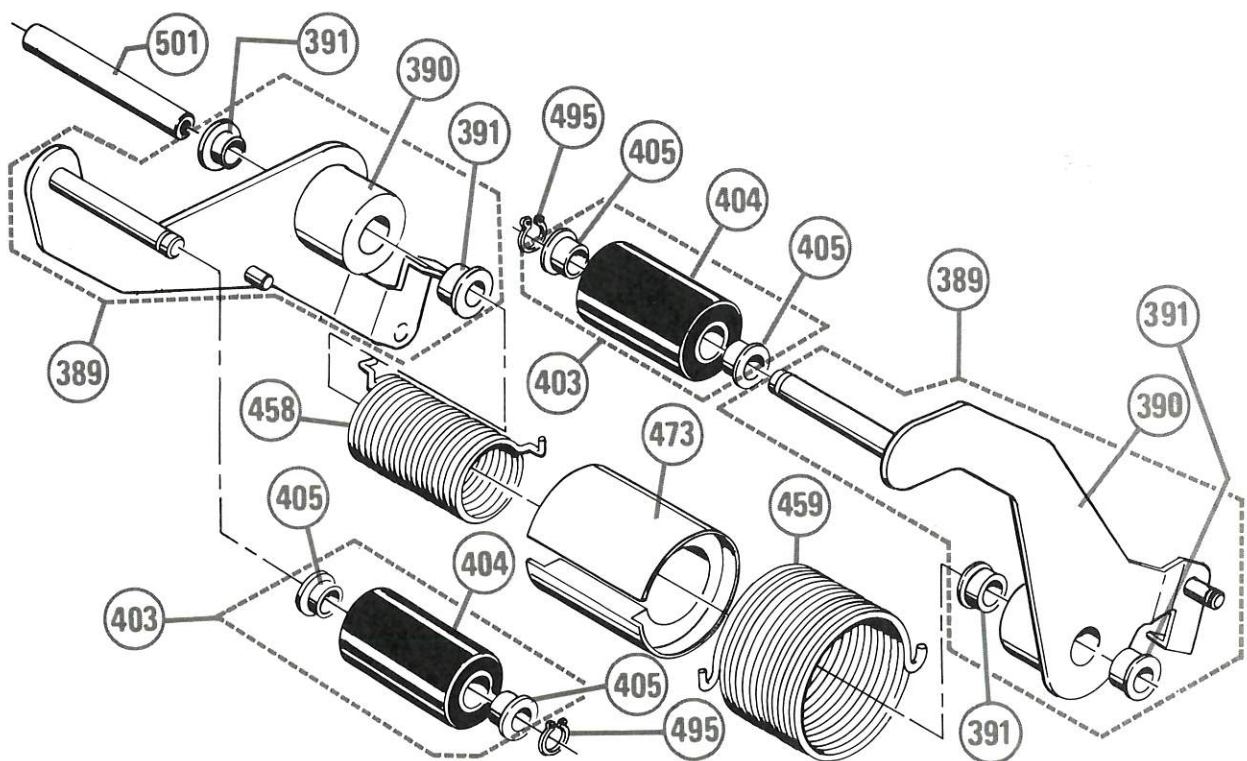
BUFFING ARM ASSEMBLY - LOWER HEAD
